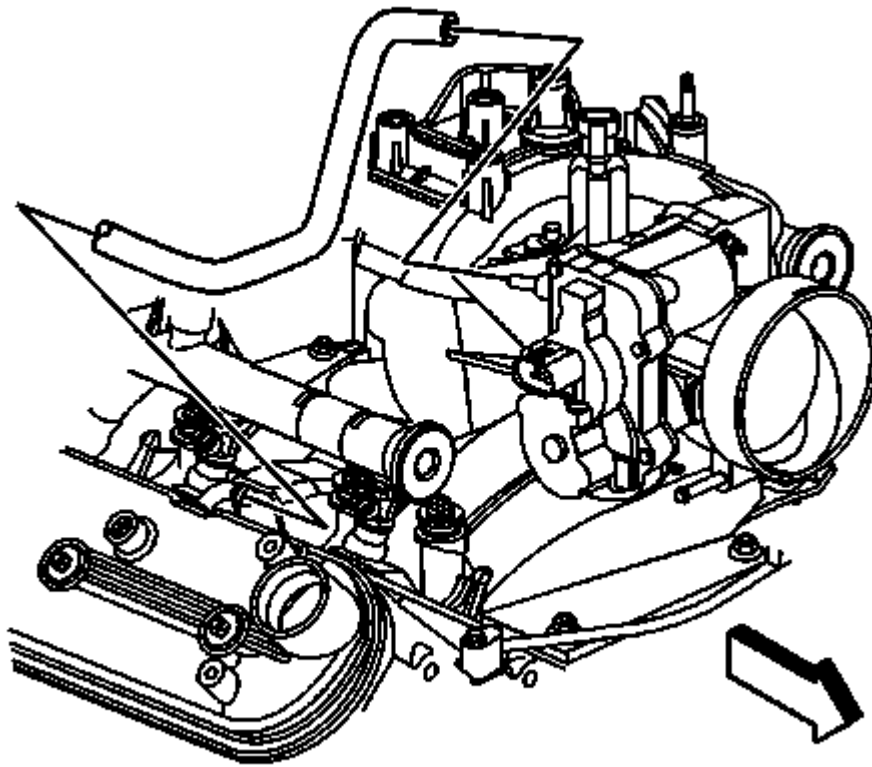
View Of Throttle Body To Valve Rocker Arm Cover PCV Hose
